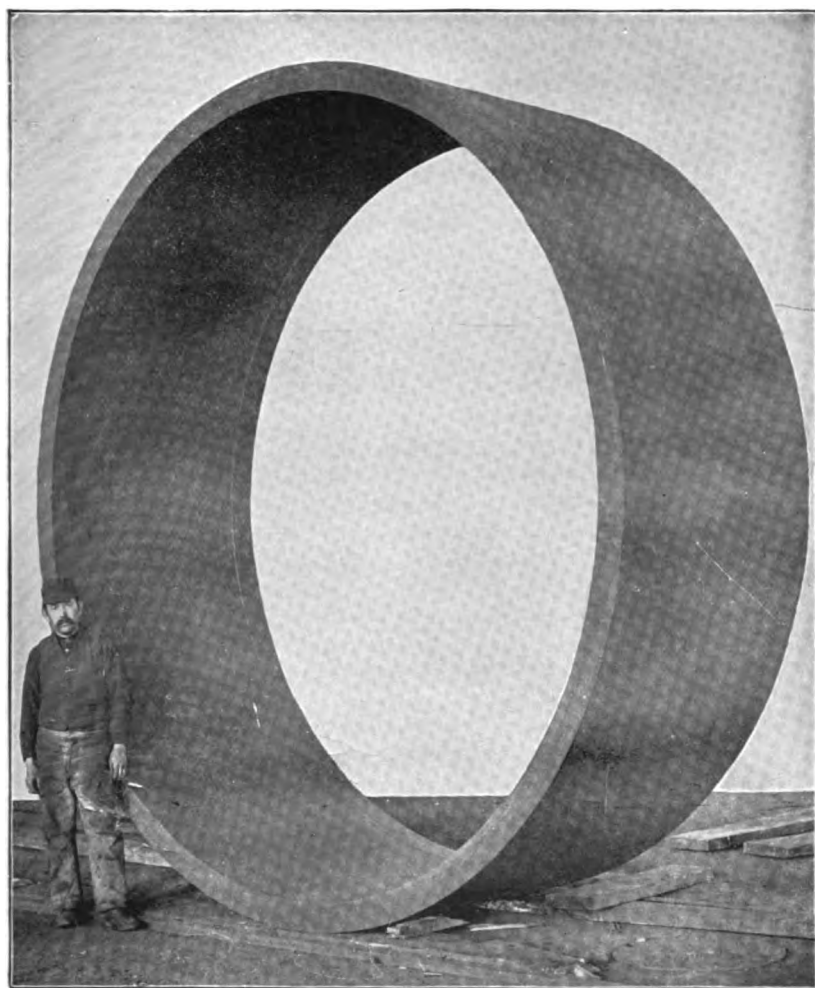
Specimen Steel Ring, Hydraulically Forged without Weld.
